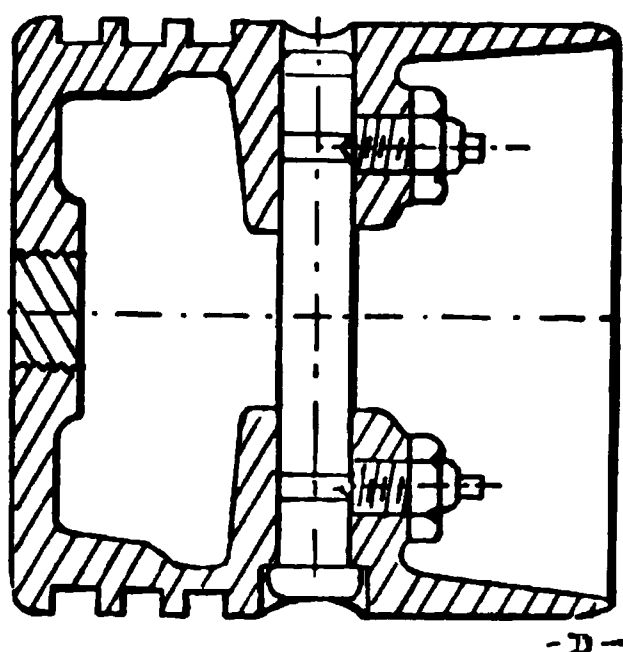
Section through a typical Trunk Piston for a Gasoline Engine. Around the circumference, near the rear end, are three circular grooves for inserting the packing rings. Through the central diameter is a perforation for admitting the piston pin, which is held in place by square-headed screws.
